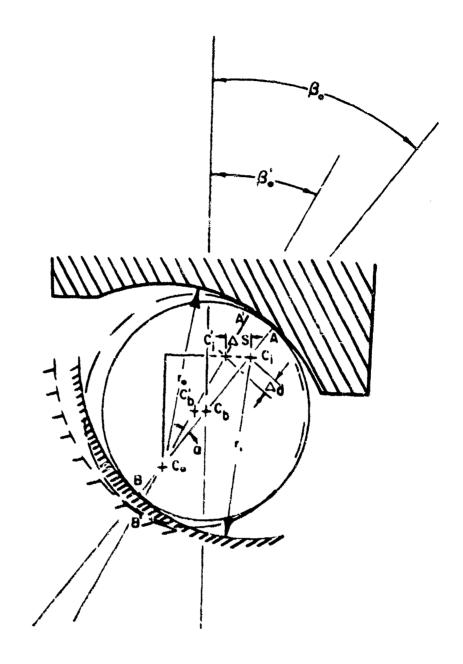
Schematic Drawing Showing Axially Displaced Bearing Race
